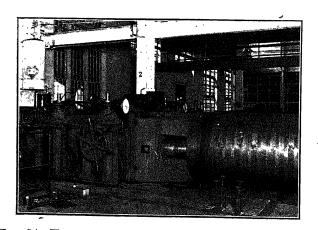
Hydraulic Bolt Puller for Tightening Through Bolts in Plate Type Turbo Rotor
